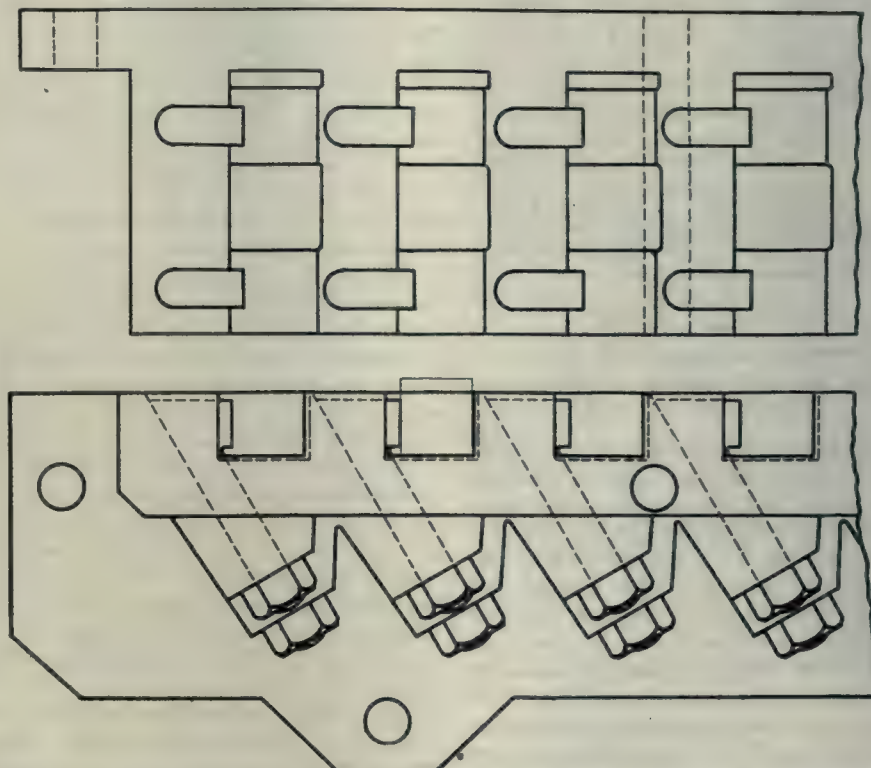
CONTINUOUS MILLING CAM ROLLER SLIDES FOR GASOLINE ENGINES.
